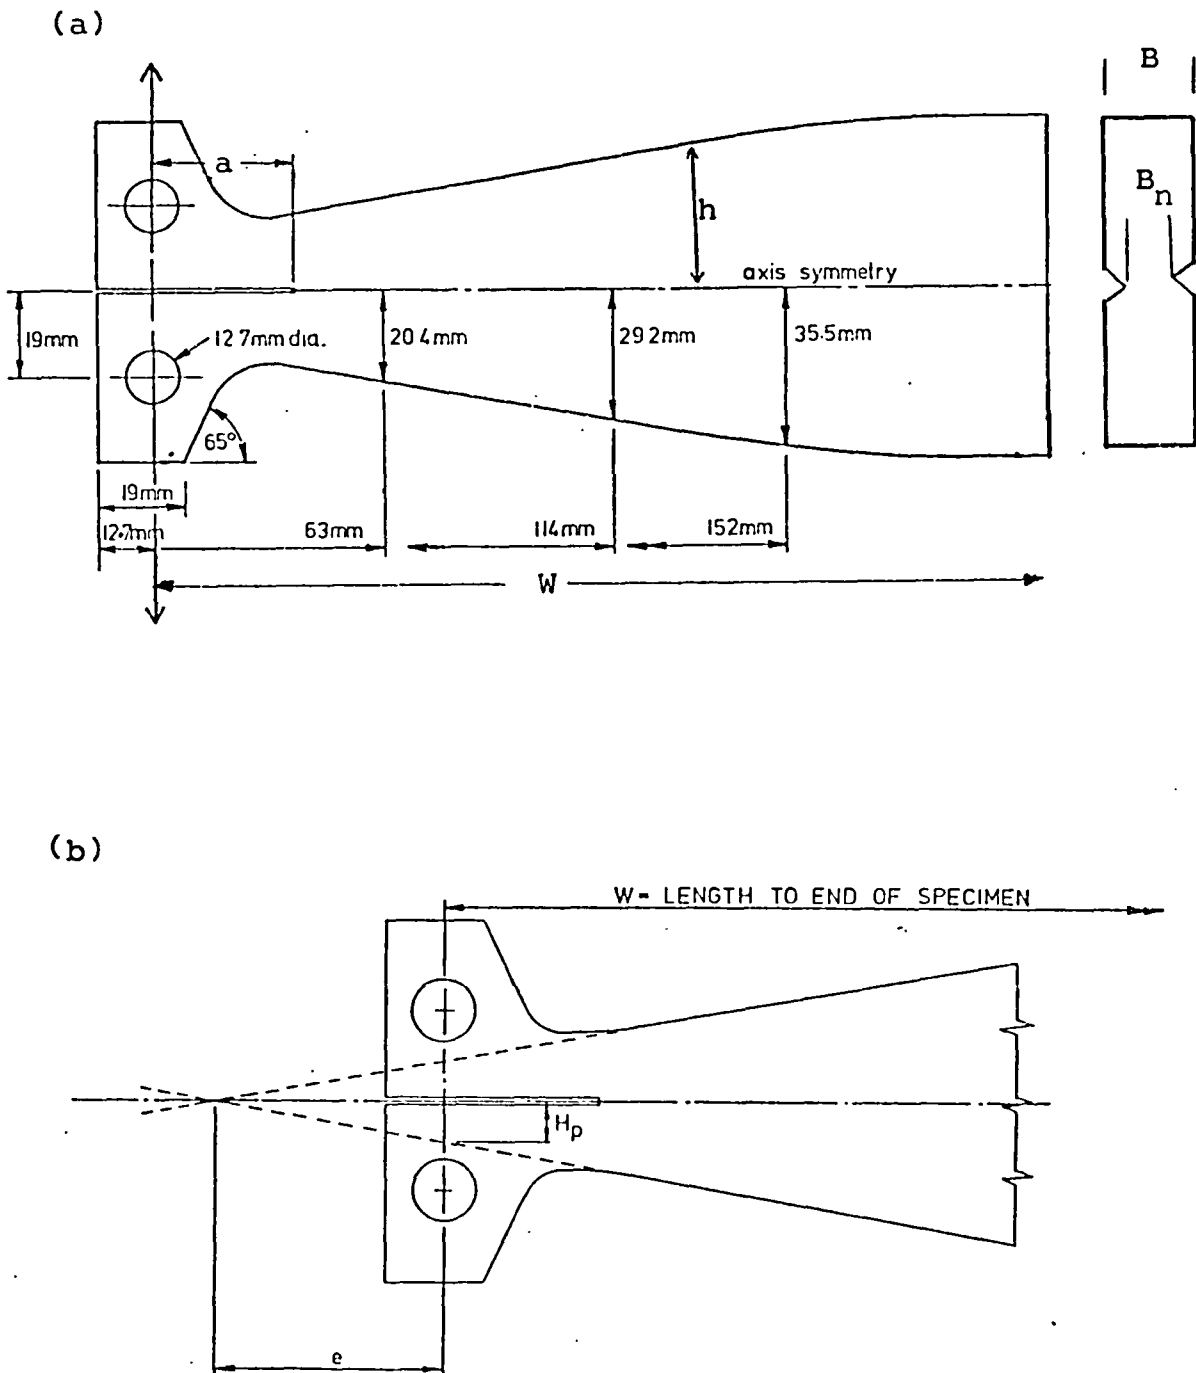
(a) The actual dimensions of the DCB-C test-pieces used.
